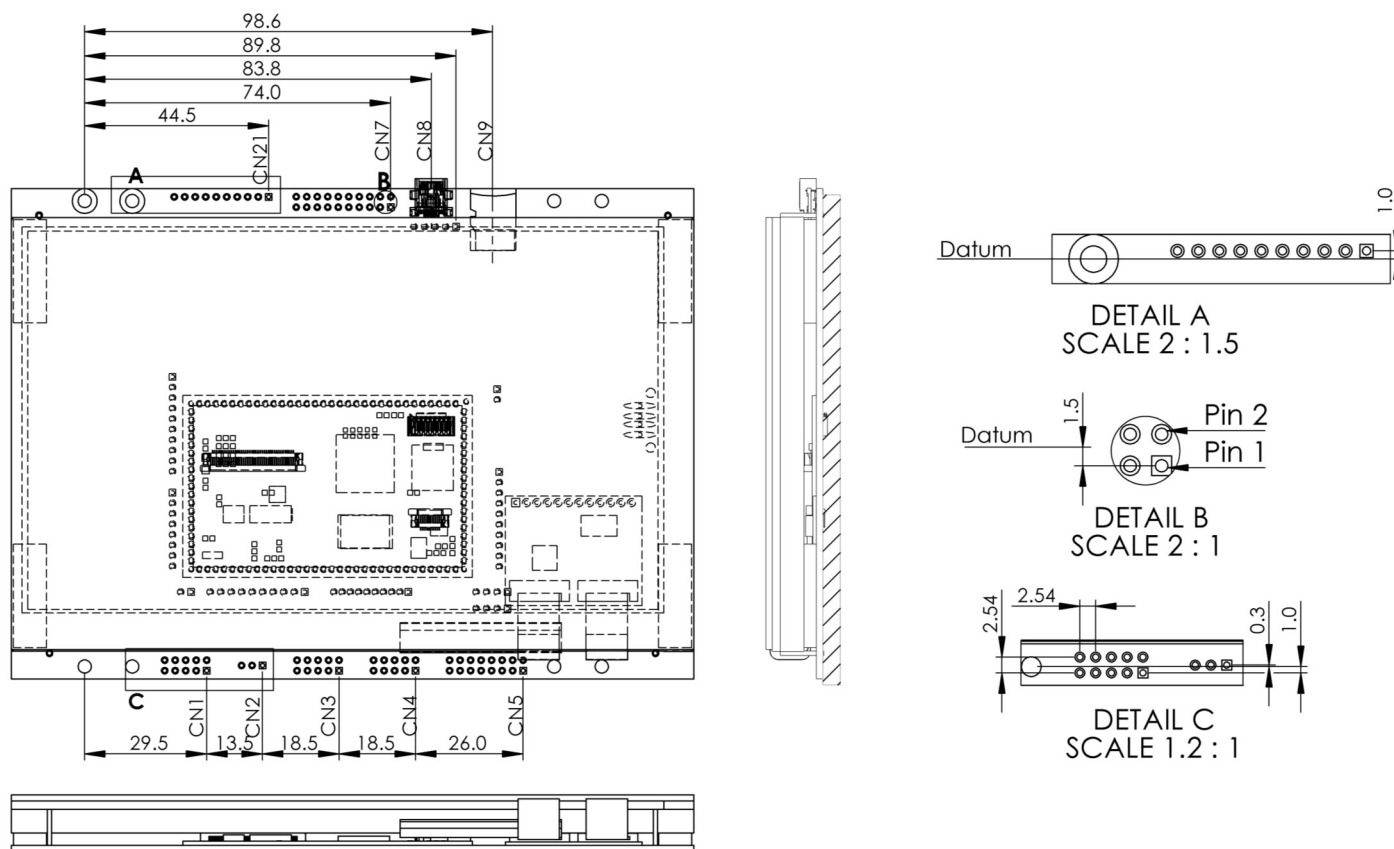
TW800x480C-K619SE4R2MU Connector Location drawing. Reference dimensions only.
